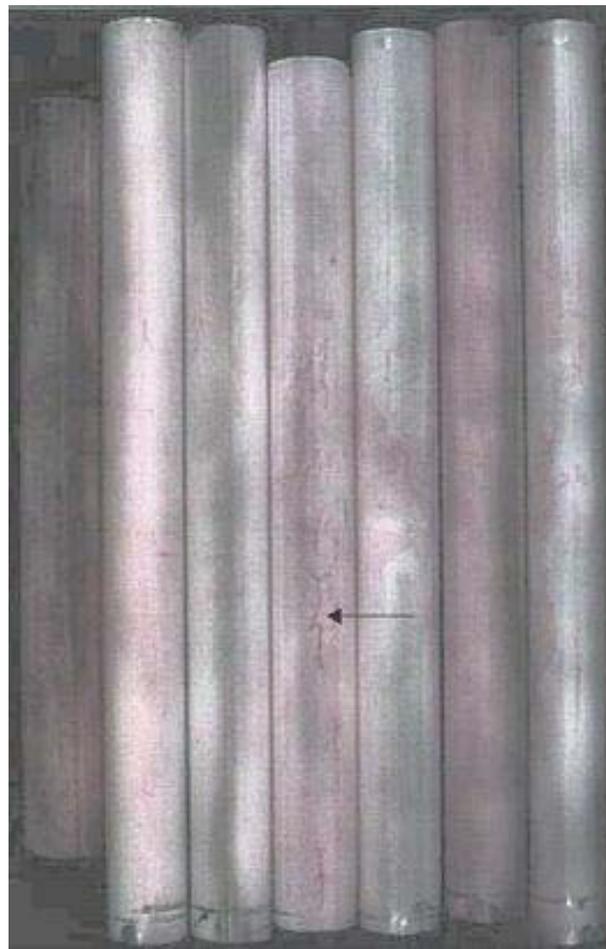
Cracking on the shell side of Type 316L SS tubes in steam service at 450°F (232°C), showing tubes after PT inspection. The cracks can be seen in the center tube (arrow).
